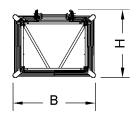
Dimensions of 2821/2316 reducing piece 40 ft
